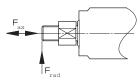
Load on output shaft for basic motor with threaded shaft.
